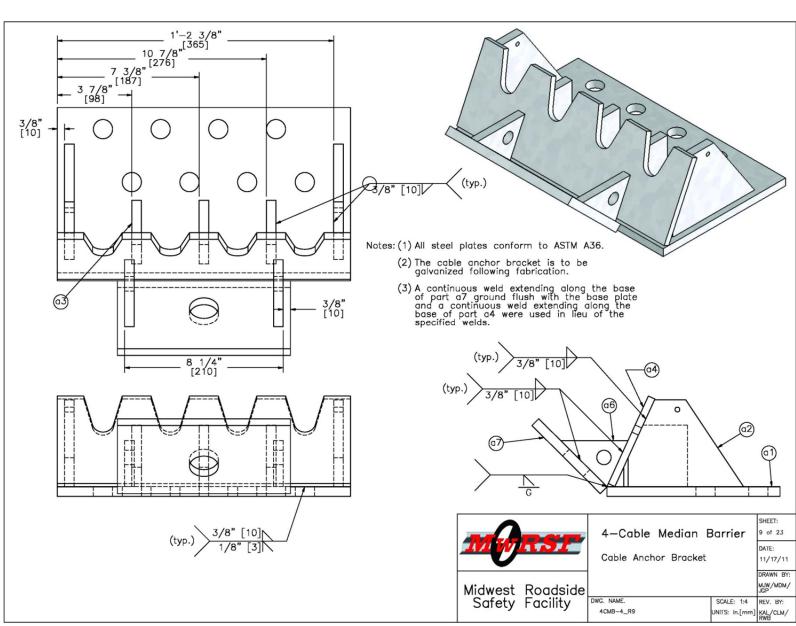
Anchor Bracket Details, Test No. 4CMB-4
